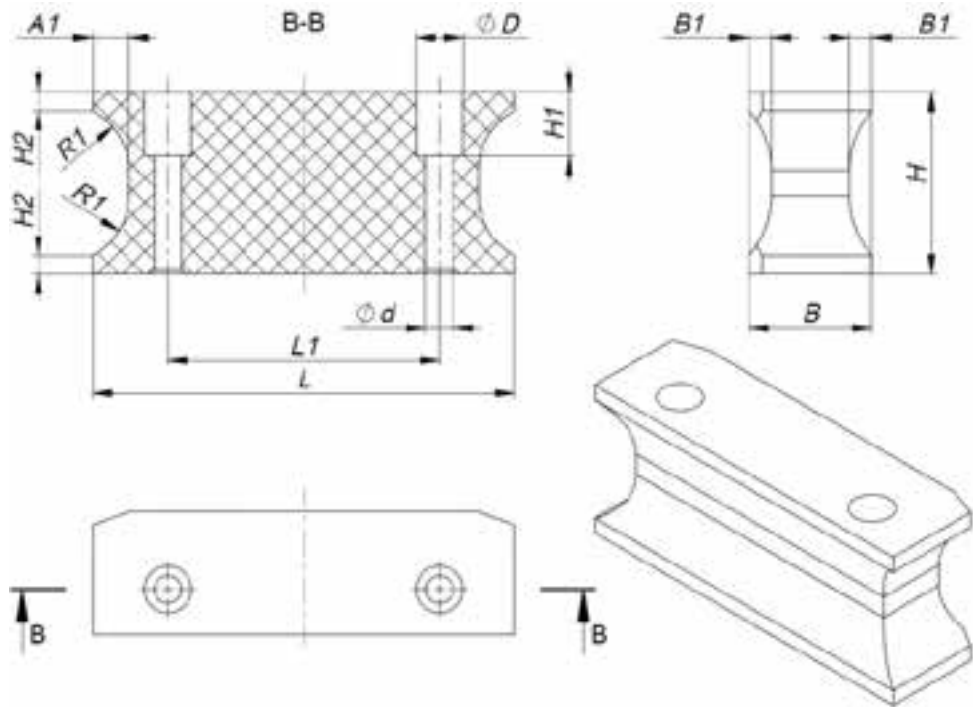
Diagram of the undercut insert (type 2): H – height, L – length, B – width, $L1$ – spacing of mounting holes, D , d – diameters of screw sockets, $R1$ – undercut radius
